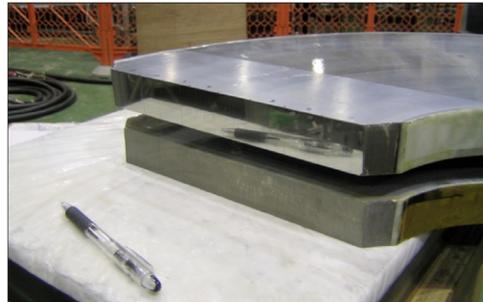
Picture of core cutting surfaces. The lower cutting surface is obtained after water jet cutting and the upper one is after polishing with diamond powder.
